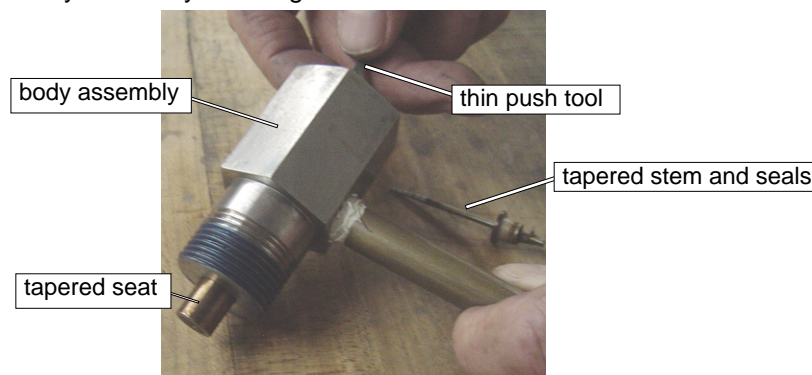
Push Tapered Seat and Erosion Shield out of Body Assembly
